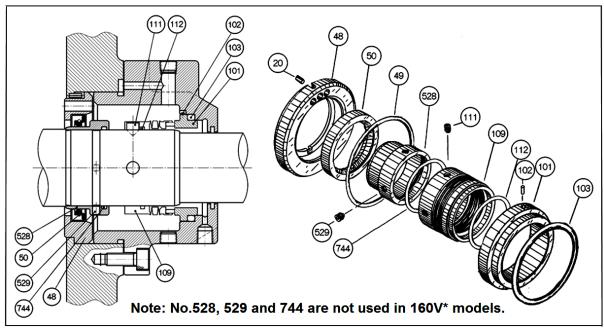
BBSE type Mechanical Seal Assembly and Related Parts
